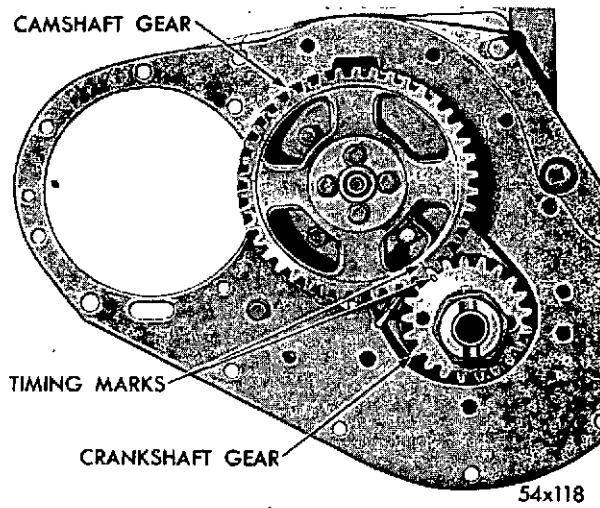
Mating Timing Marks on Camshaft and Crankshaft Gears
